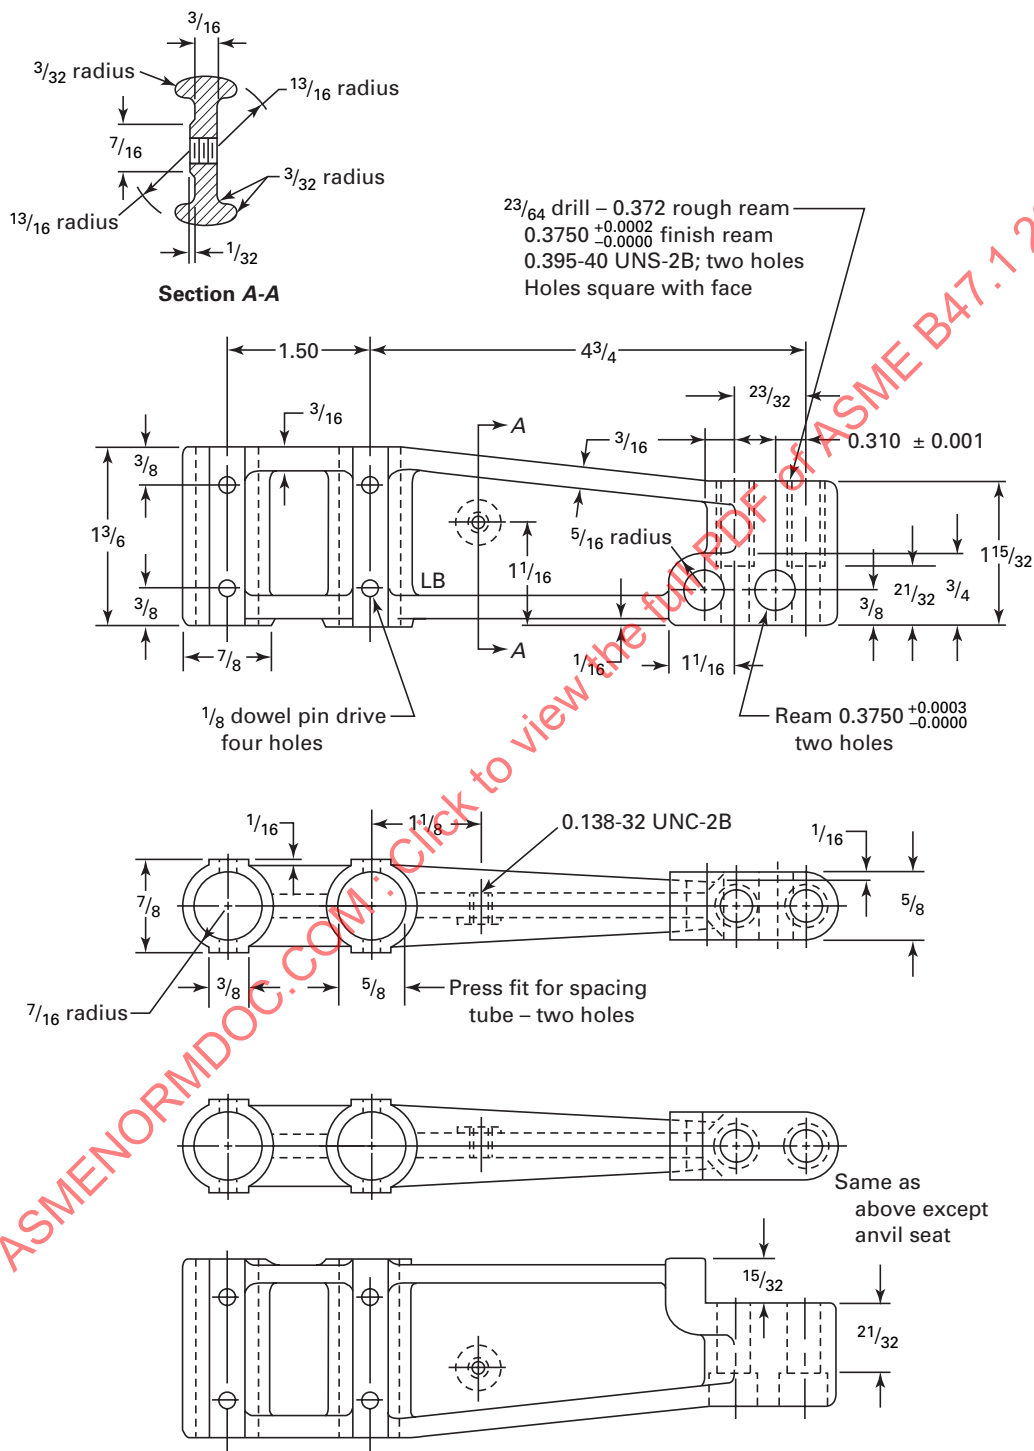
Adjustable Length Gauge, Progressive, Model LB, Details of Gage Heads
